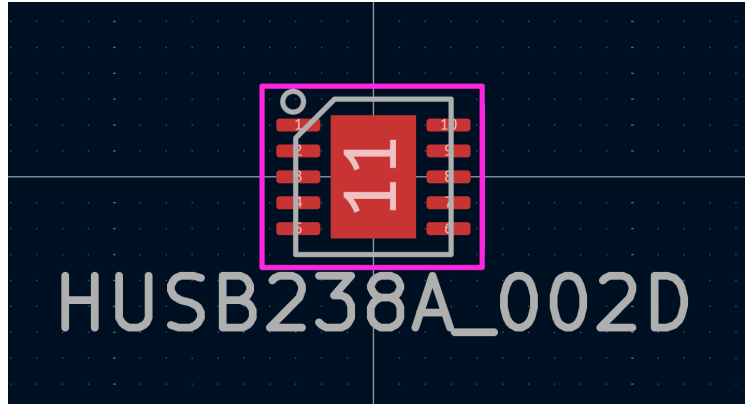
Completed footprint showing 10 SMD pads and the central thermal pad (Pin 11).
